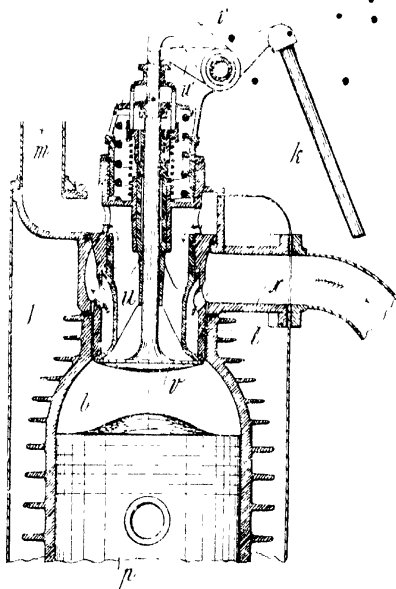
Combined admission and exhaust valve for air-cooled aero motor.
